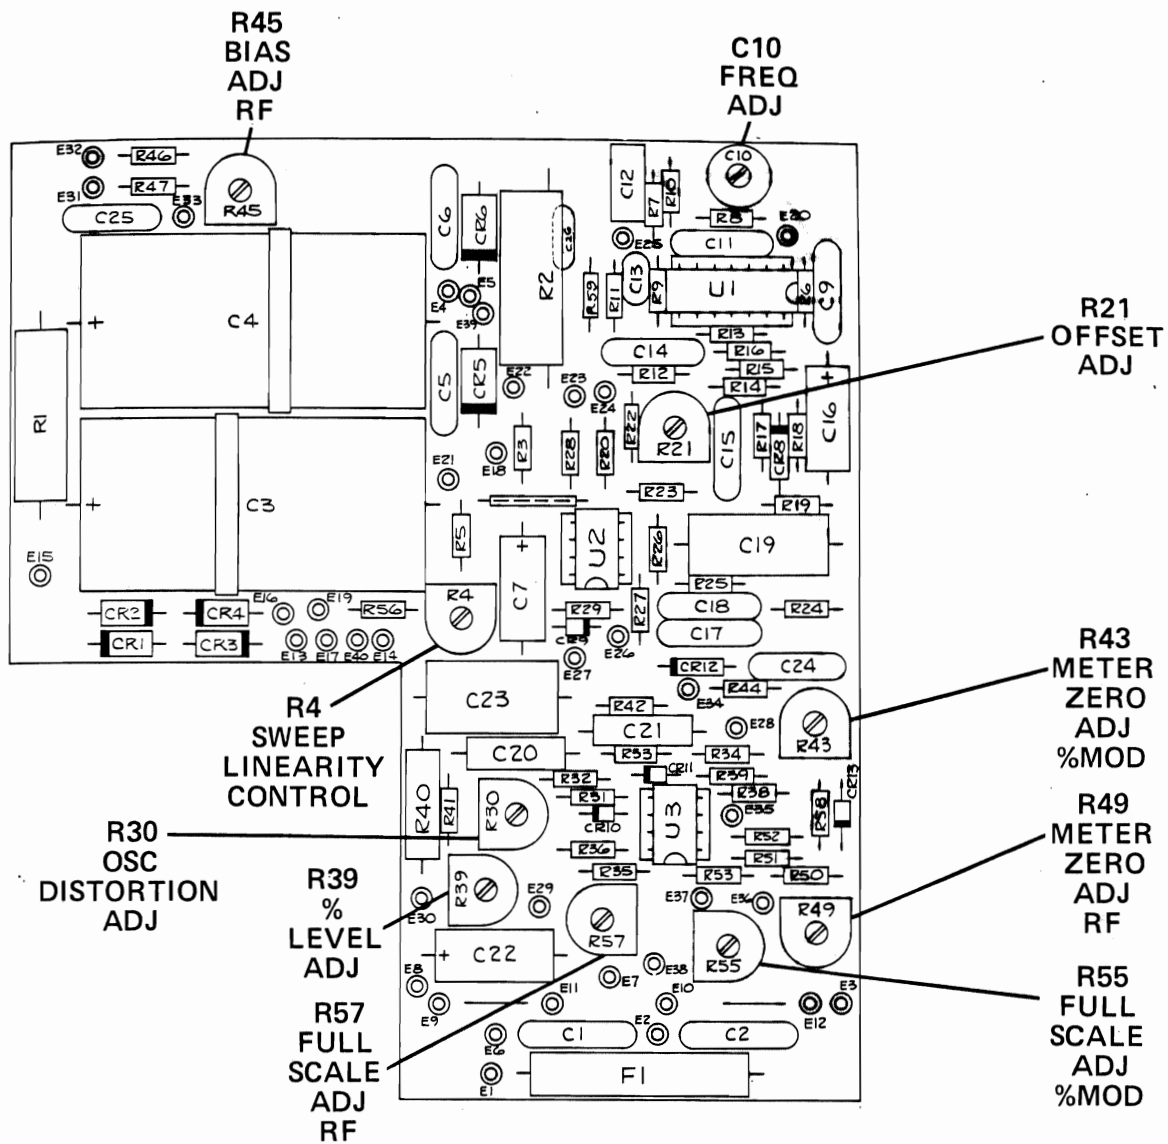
Printed Circuit Board A1A2, Components and Adjustments
